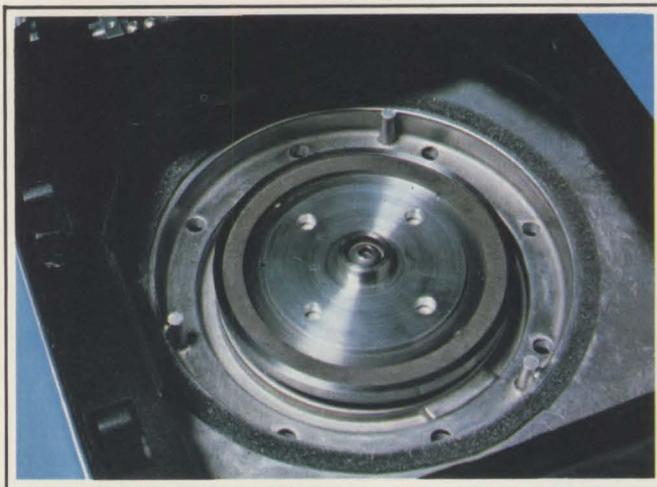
Close-up of spindle and magnetic chuck. Cartridge's contact with the chuck frees the disk to rotate.
